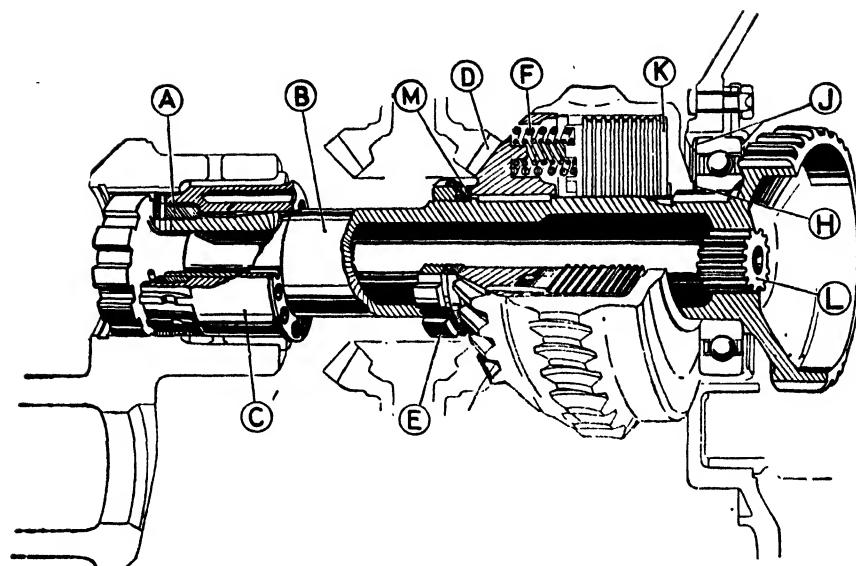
Section of Spring Drive and Hand Starter Gear.
